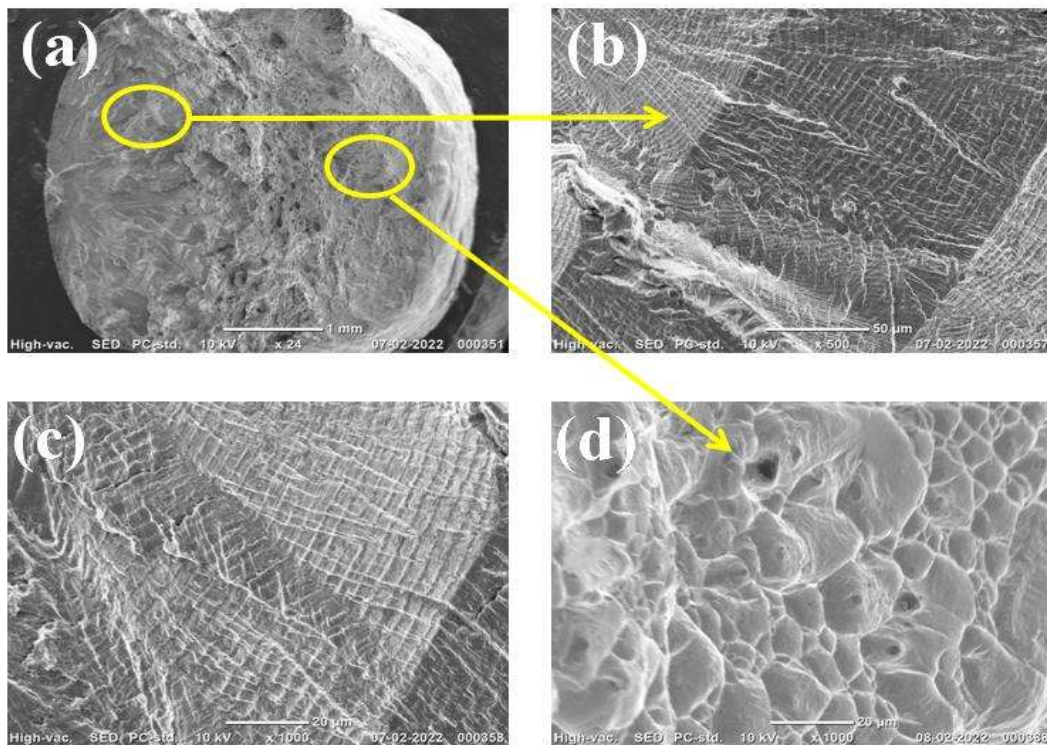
Fracture surface of Inconel 617 alloy ratcheted at 800°C: (a) full view of the fracture surface (b) magnified view of the fatigue region showing striations (c) magnified view of striations and (d) magnified view of the tensile region showing dimples.
